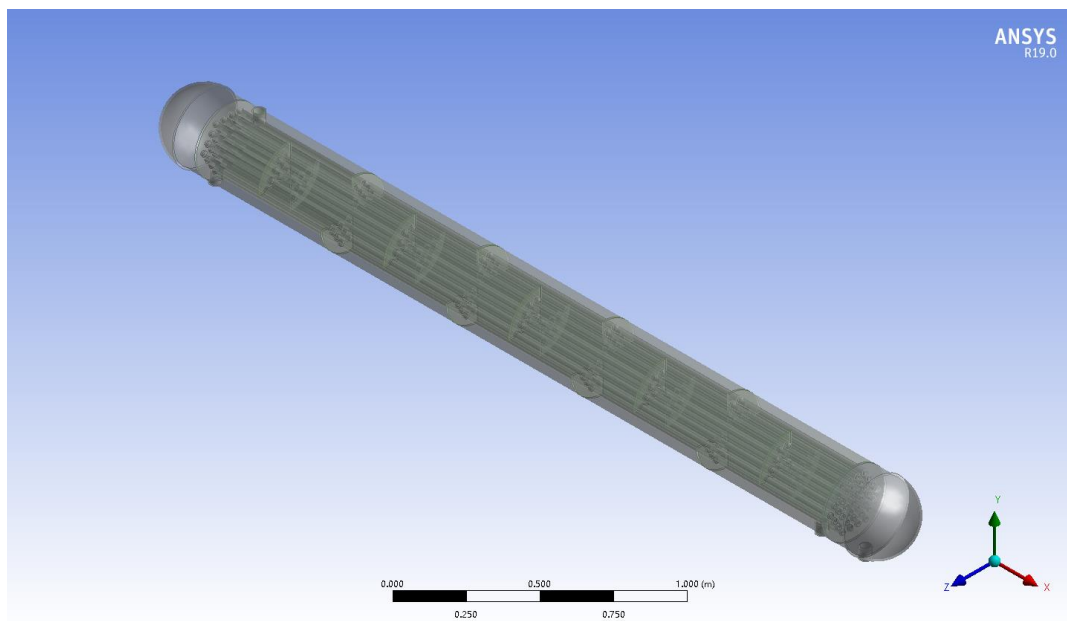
Three-dimensional model of shell-and-tube heat exchanger
